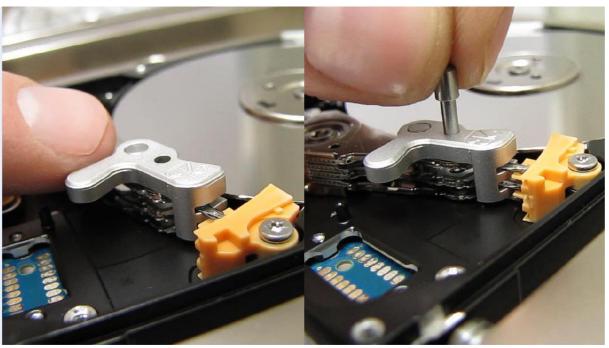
(mounting the Sea 2.5" Ramp p2b tool)
